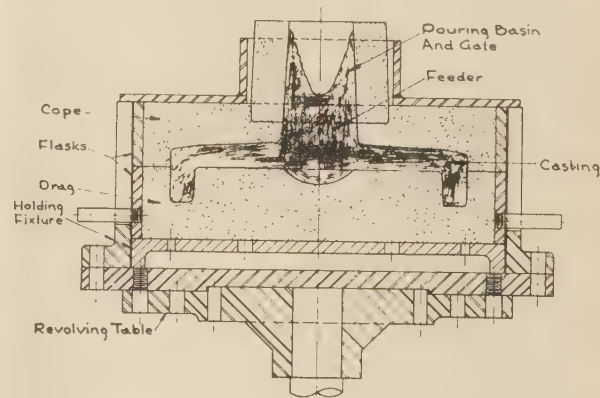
SEMICENTRIFUGAL CASTING OF FLYWHEEL WITH SOLID CENTER
